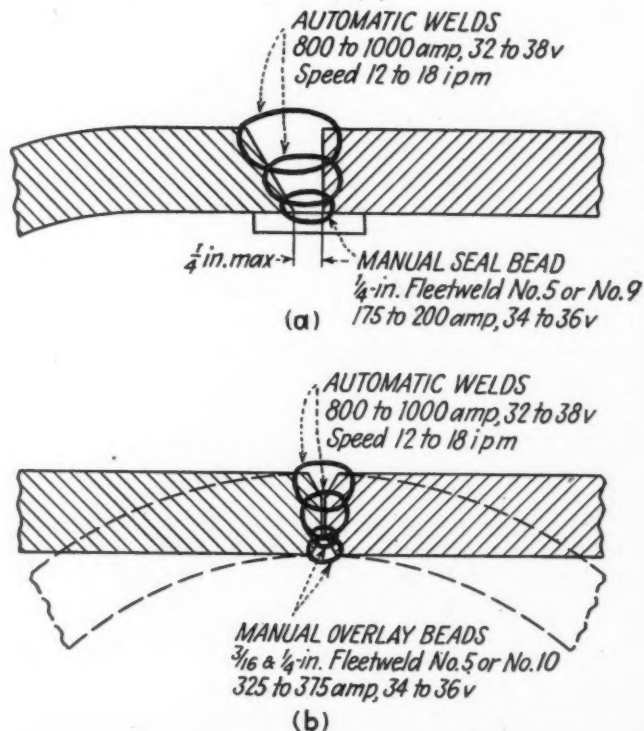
On $\frac{3}{4}$ -in. plate, head and shell welds are made as shown at (a); longitudinal and circumferential welds are shown at (b).
